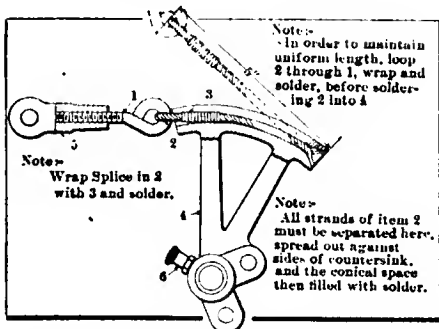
Quadrant lever to which brake cable is fastened, offered to indicate extent to which details are worked out
